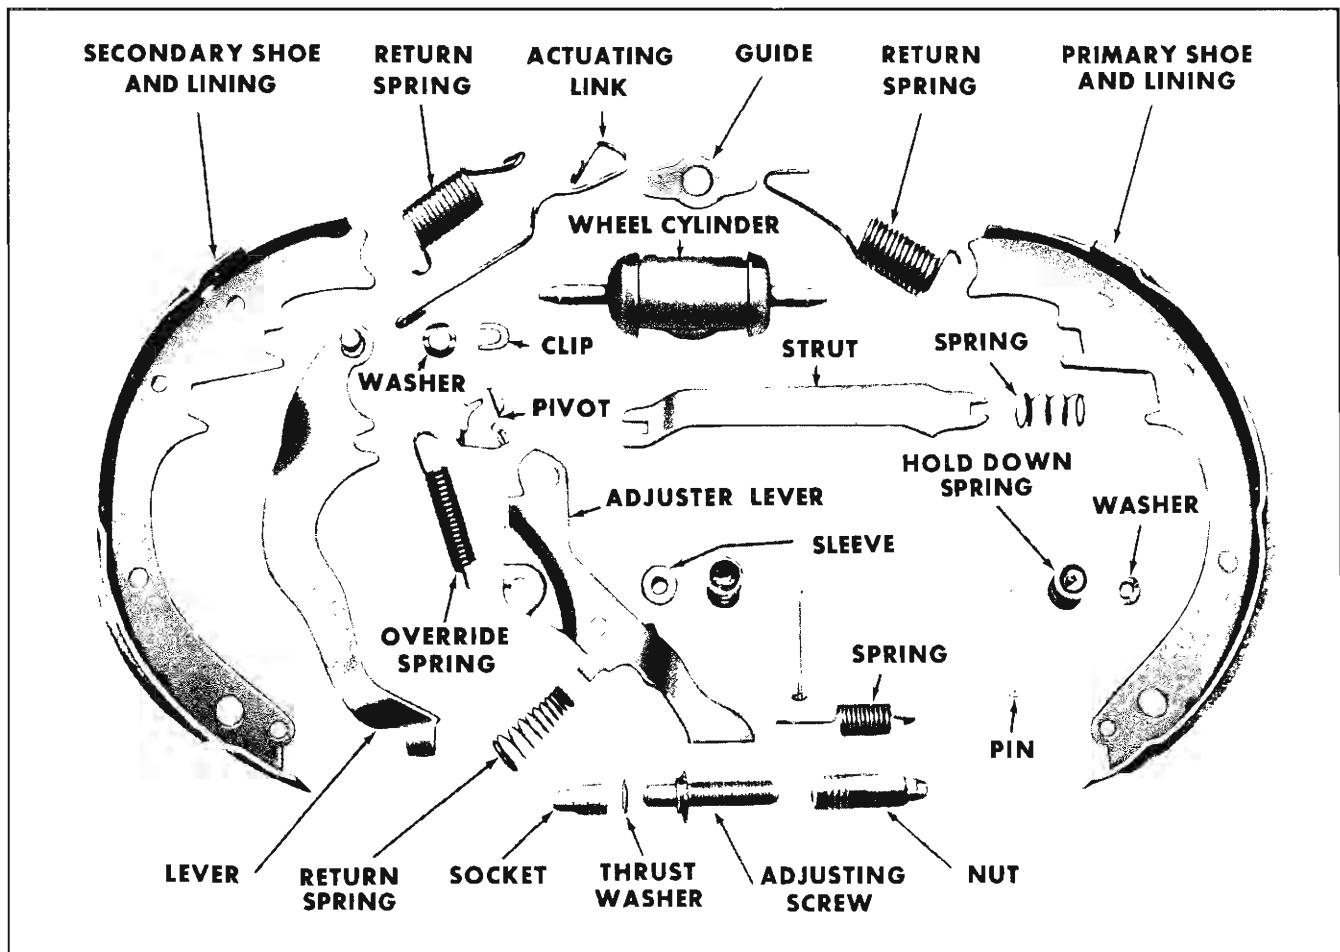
Self-Adjusting Brake Assembly—Exploded View
